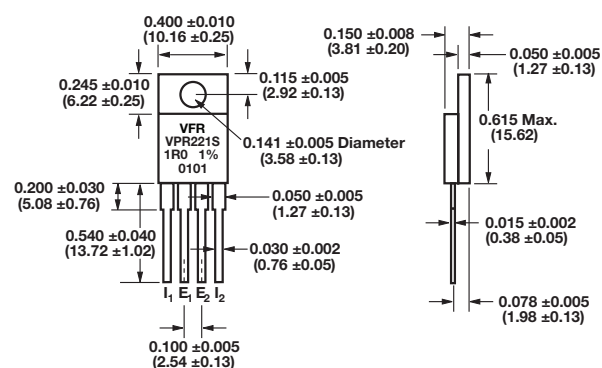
VPR220S Land Pattern Dimensions in inches (millimeters)
